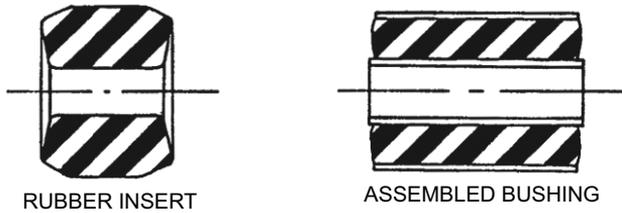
Silentbloc bushing that shows a rubber insert between inner and outer metal sleeves [319]
